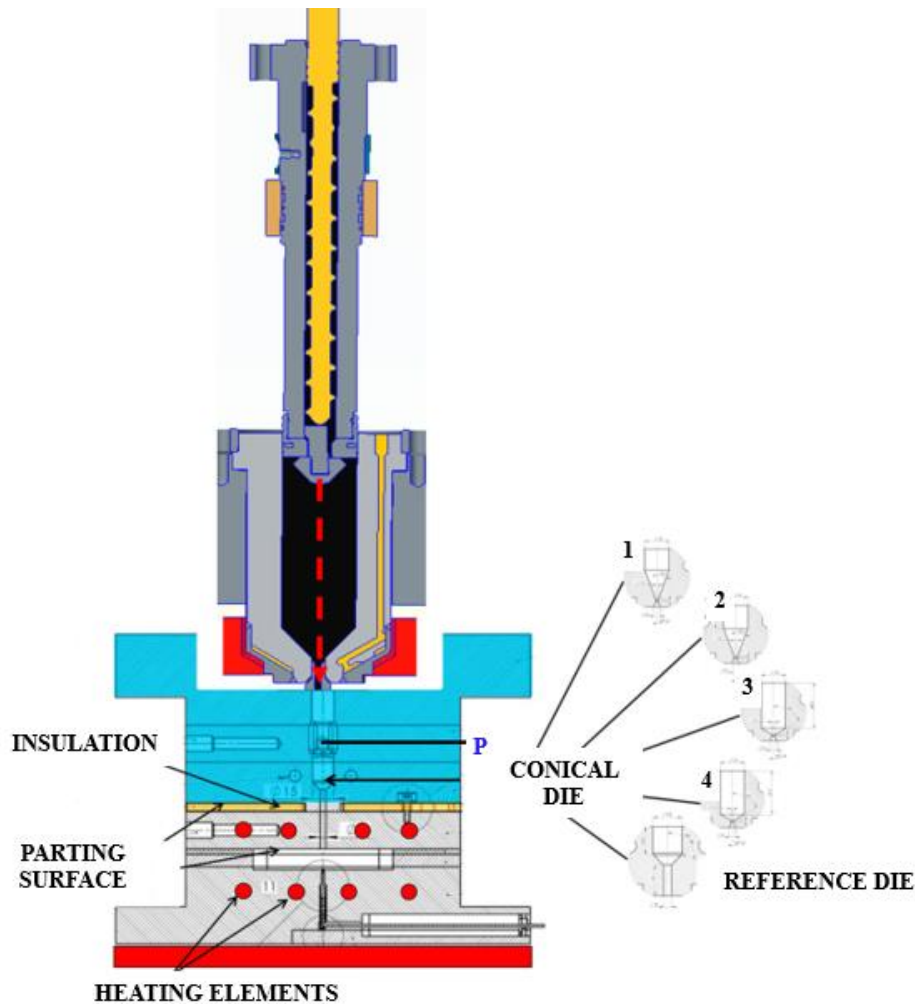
FIFO injection unit and prototype injection mold with conical dies [87].
